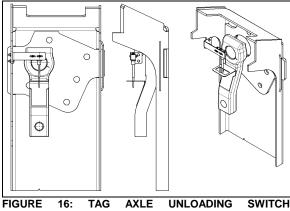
TAG AXLE UNLOADING SWITCH ADJUSTMENT 14061
